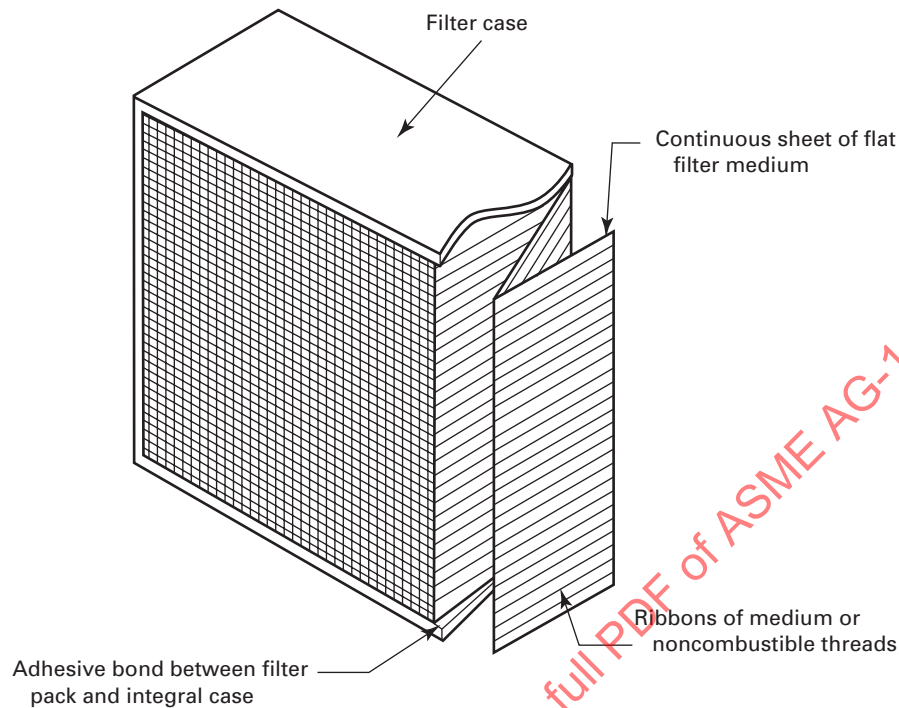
TYPE D THREAD SEPARATOR FILTER
